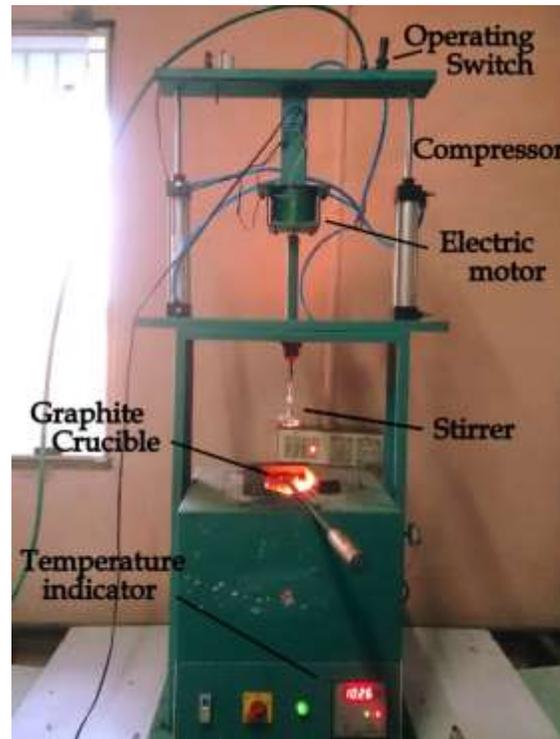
Stir Casting setup for fabrication of (Al8011/ B₄C/ Red Mud)
